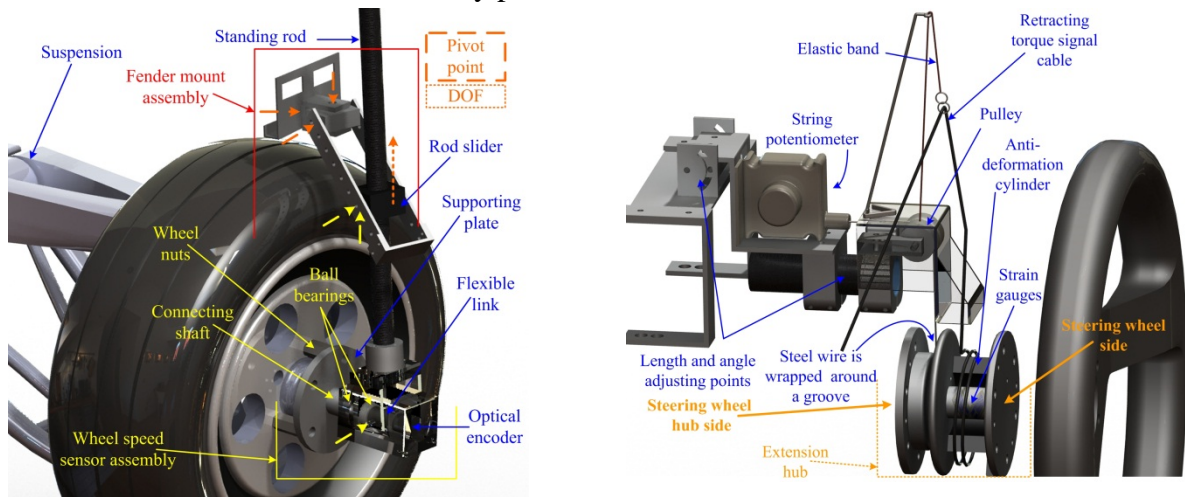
Externally fitted wheel speed sensor and steering system measurement assembly (c.f. Chapter 5, part A).
